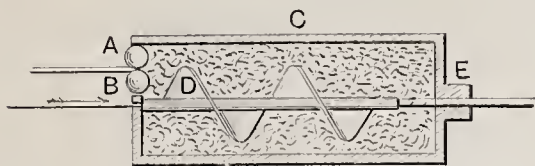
A MODERN GUTTA-PERCHA COVERING MACHINE
